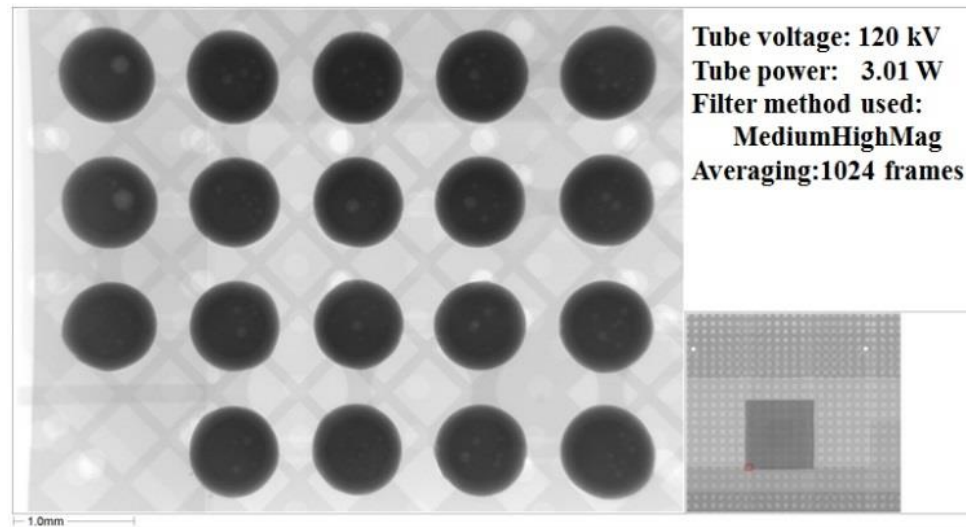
Sample X-ray image of a corner of FCBGA package from DAGE X-ray inspection system
